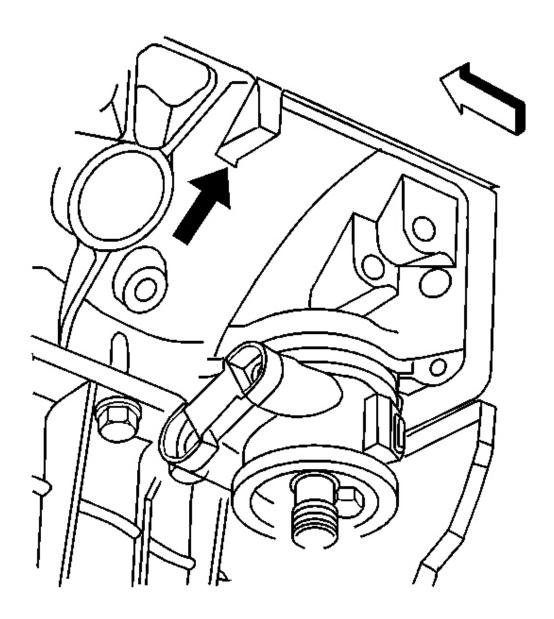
View Of Square Tab At Rear Of Engine Block Courtesy of GENERAL MOTORS CORP.
